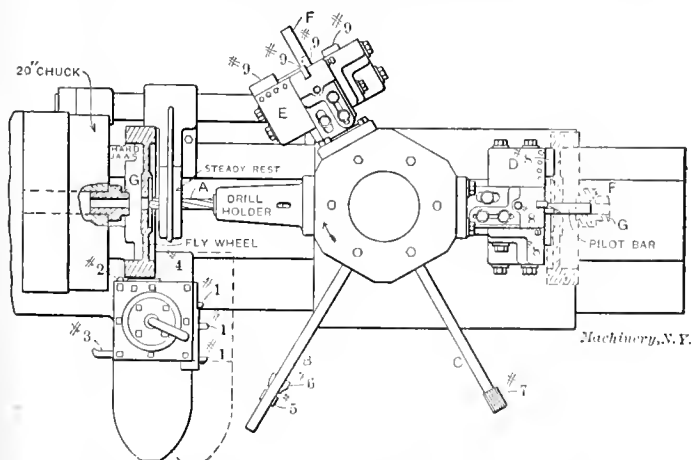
Finishing a Fly-wheel in the Libby Turret Lathe. Second part of the First Operation
